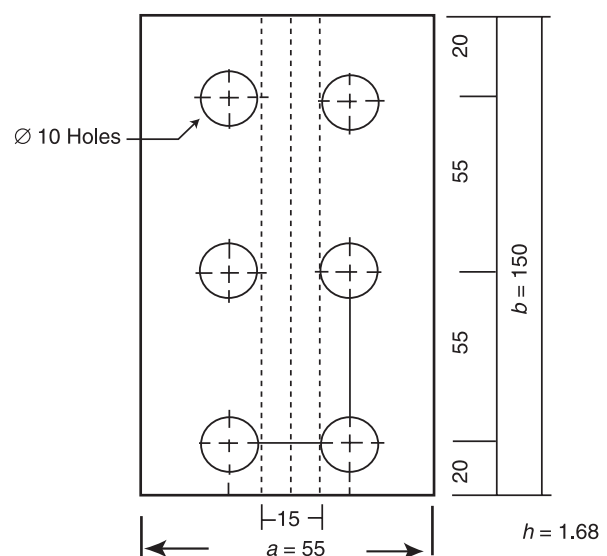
Dimensions of shear specimen (all dimensions are in millimeter)
